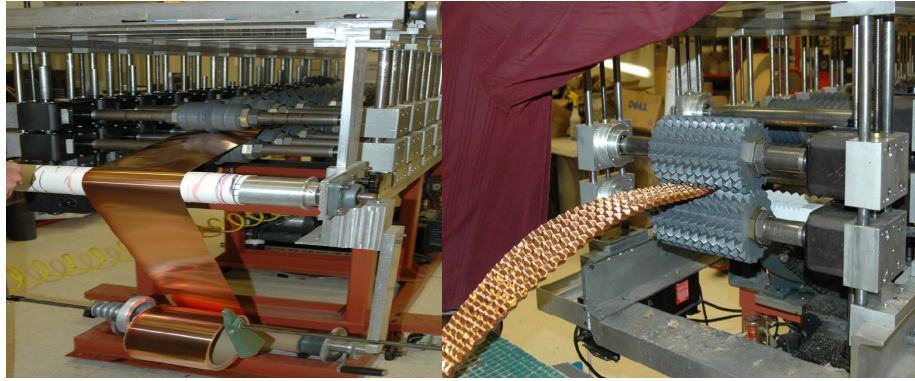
Production of Chevron folded structure by continuous folding machine from a roll stock of copper sheet material [14].
